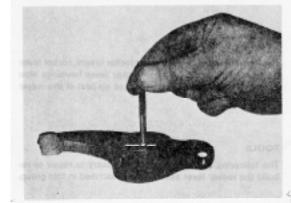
E-5. Check the Rocker Lever Bushing for Wear
